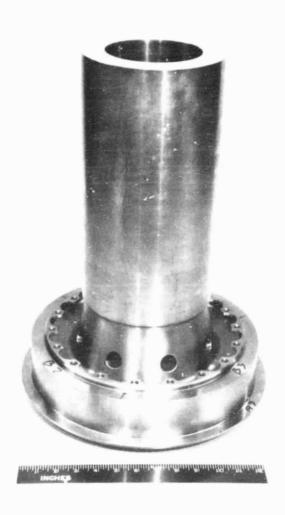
High-Pressure Compressor Sixth Stage Rotor Detail
